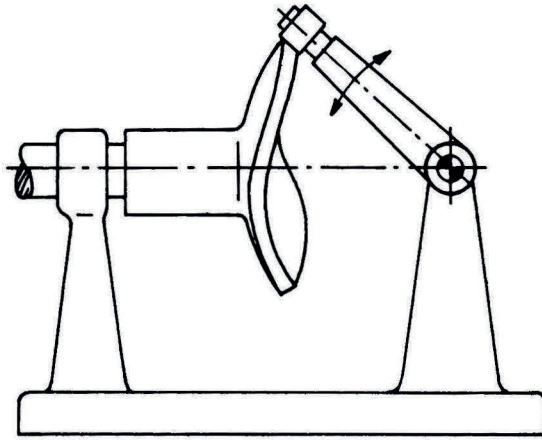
Spherical open-track cam with swinging roller follower.
